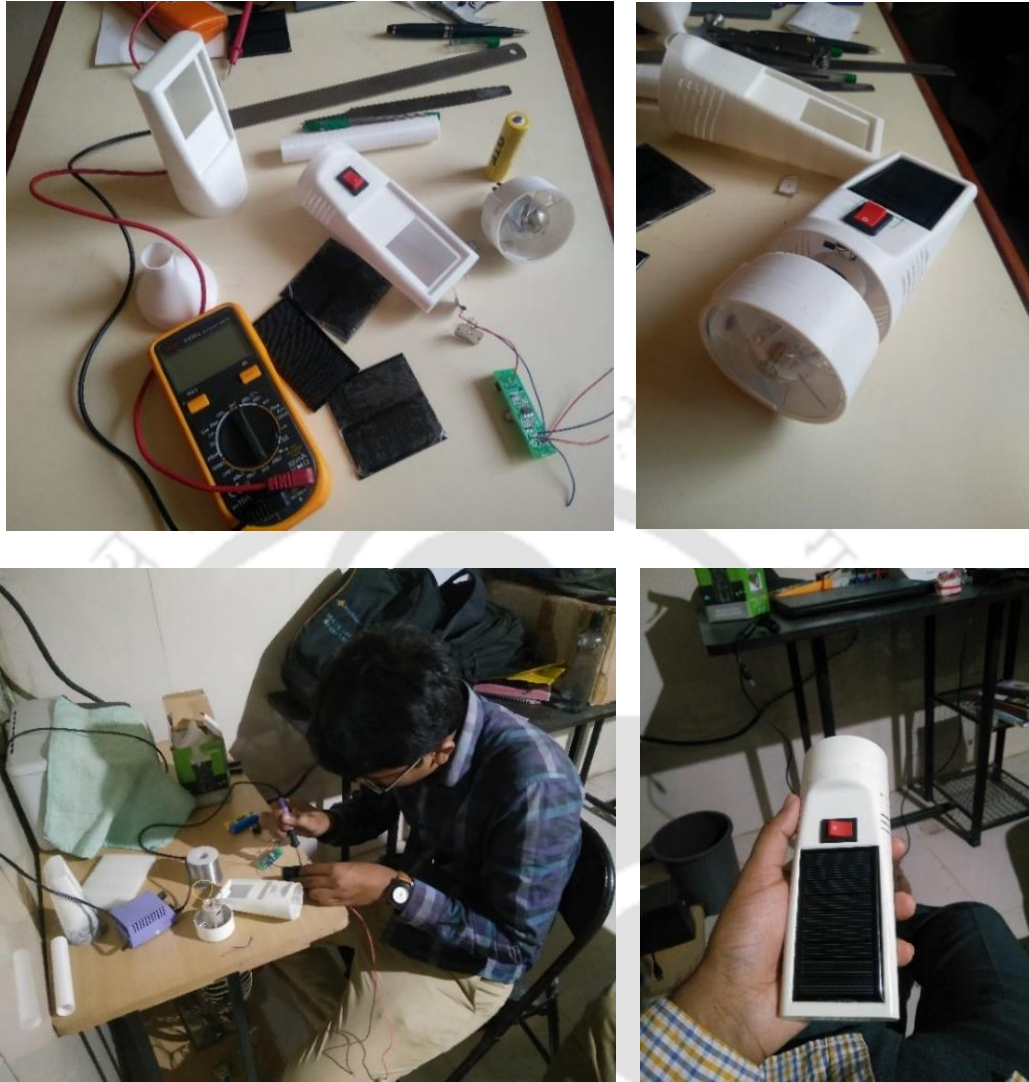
Prototyping of PIPV air blower. Top left- function components and 3D printed body of the product, Top right- placement of all the components inside the body, Bottom left – Soldering and fixing of components inside the body of the product, Bottom right- Final working prototype of the product.
